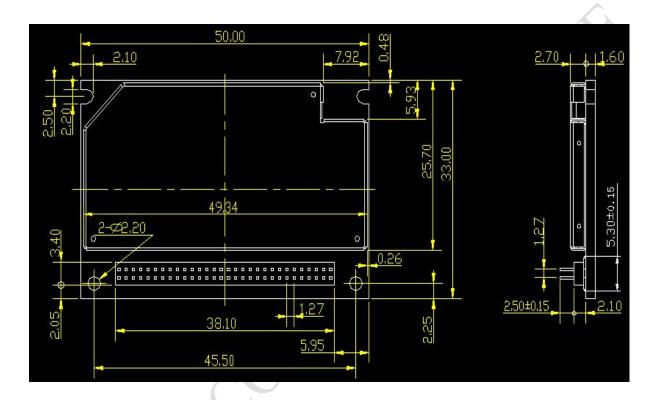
Mechanical dimensions of SIM340C (Unit: mm)
